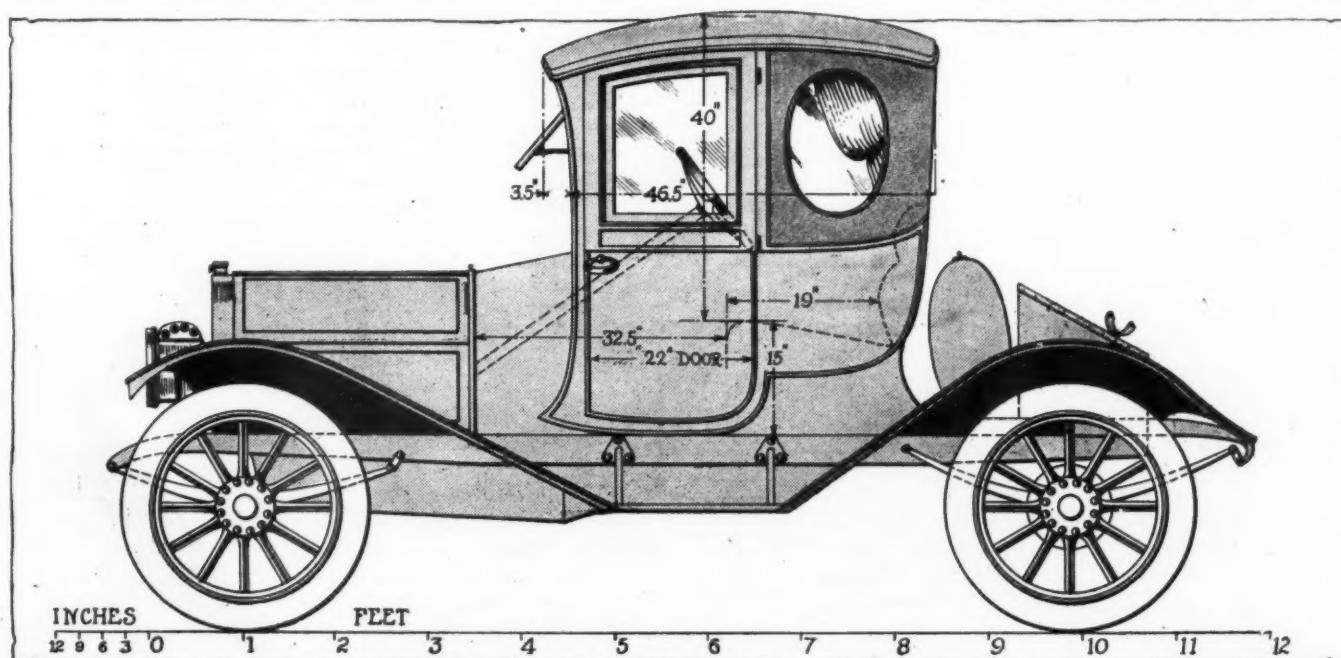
Side view to scale of suggested coupé design for 1912 Overland model 59-R
